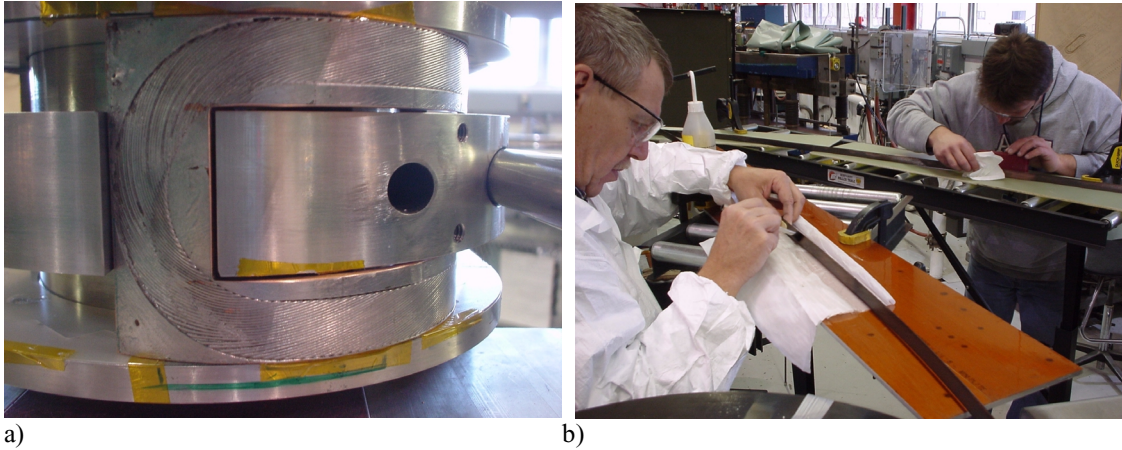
a) - Stabilizer inside a winding slot, b) - Cleaning of the cable splice area
